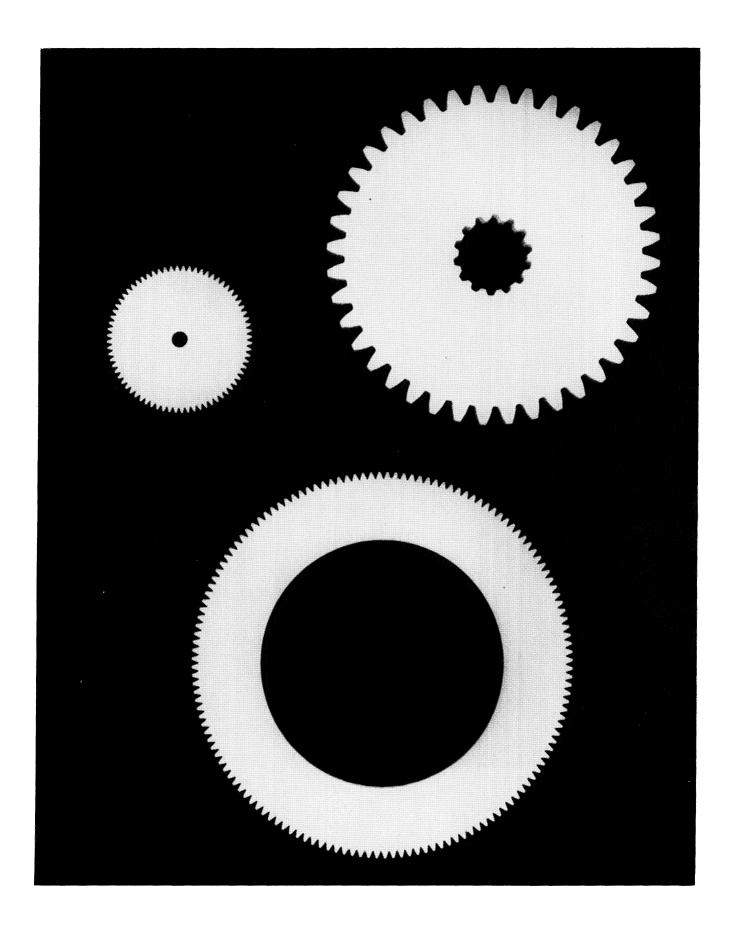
Gears with teeth cut in molded "Zytel" 101.
